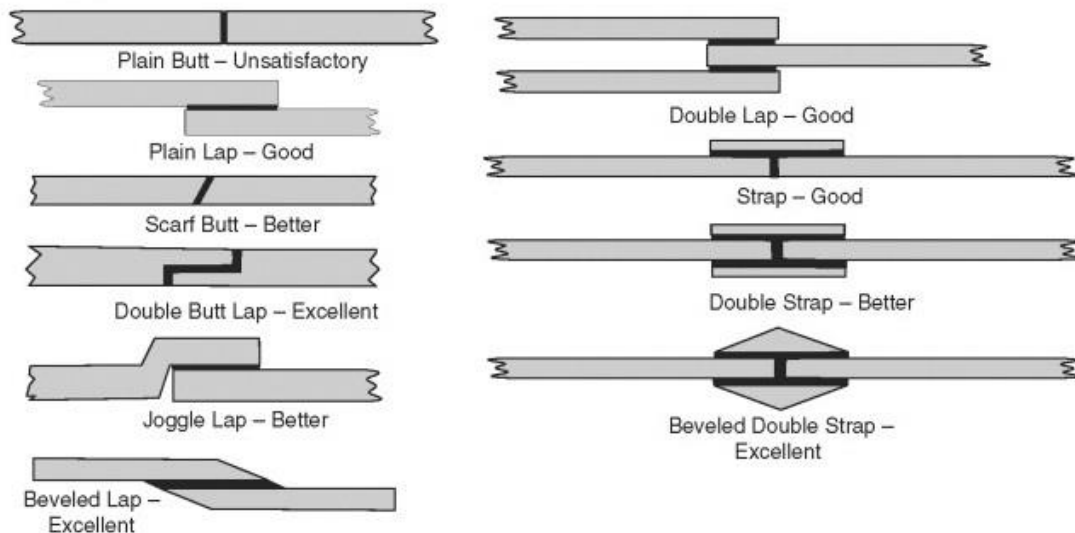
Joint designs for adhesive bonding adapted from [23]
